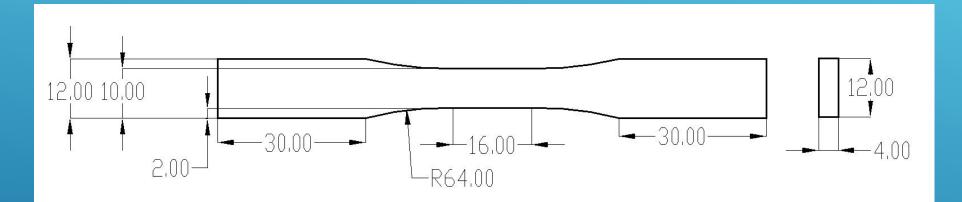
Fatigue test coupon geometry and dimension (unit: mm)
